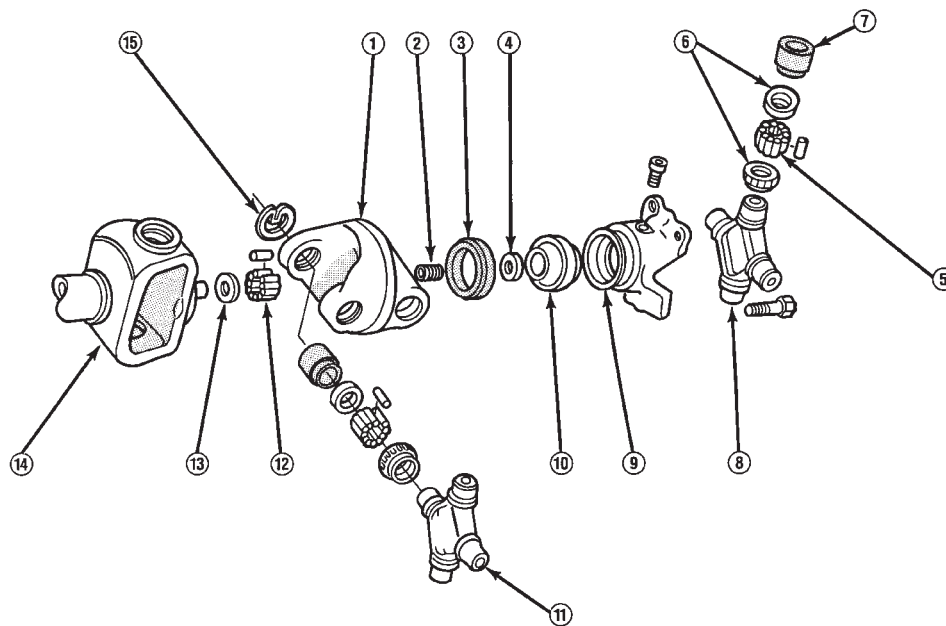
Front & Rear Propeller Shafts (4WD)
